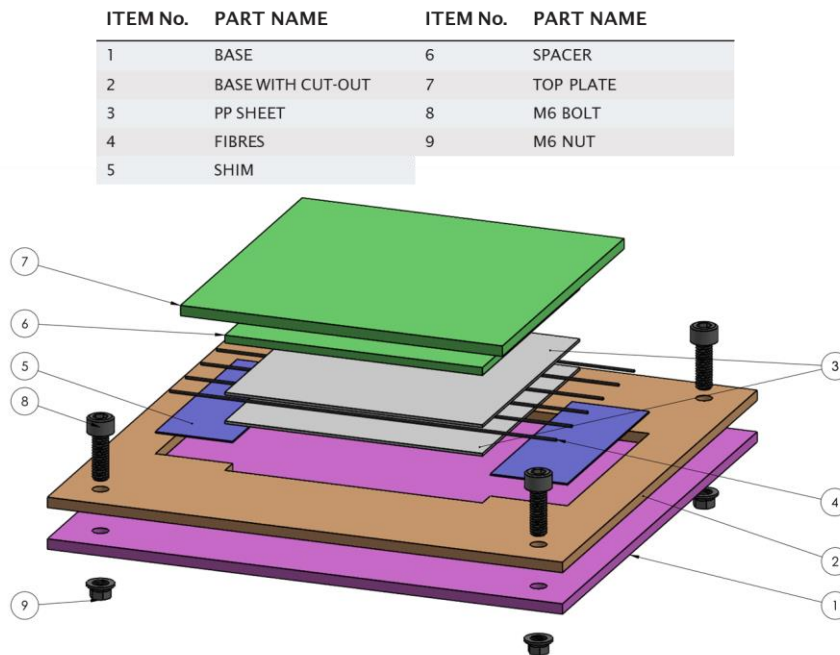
Exploded diagram of the mould used for manufacturing the samples
